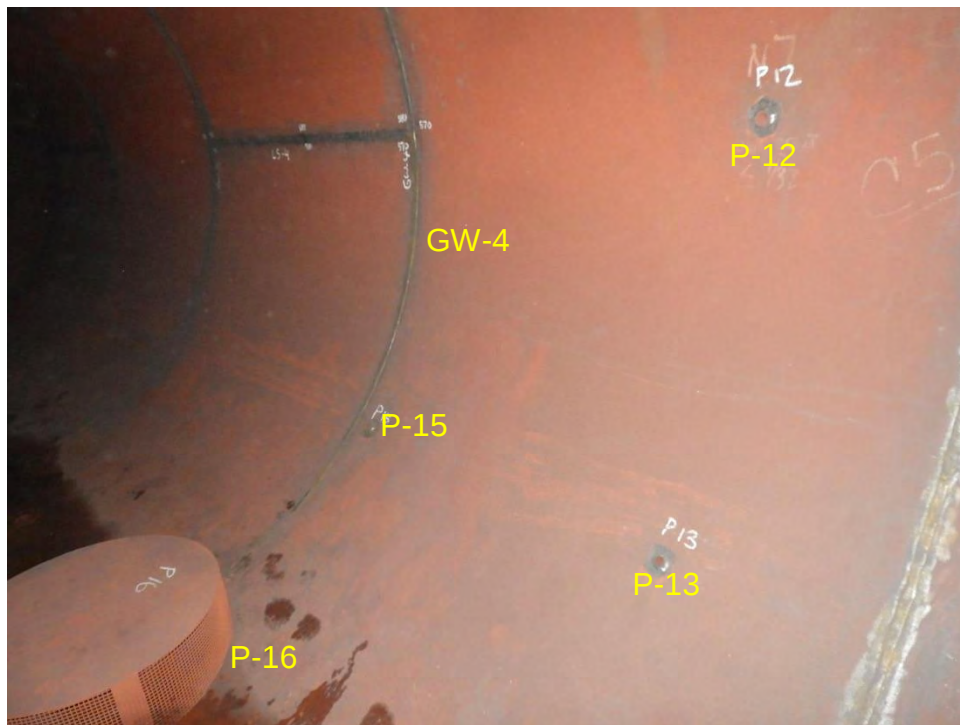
Photographs of the inspection locations on the deaerator storage tank.
